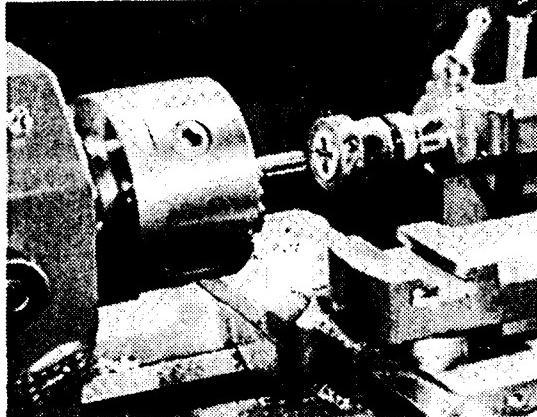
Cutting Thread with Die in Self-release Die Holder in Tailstock
